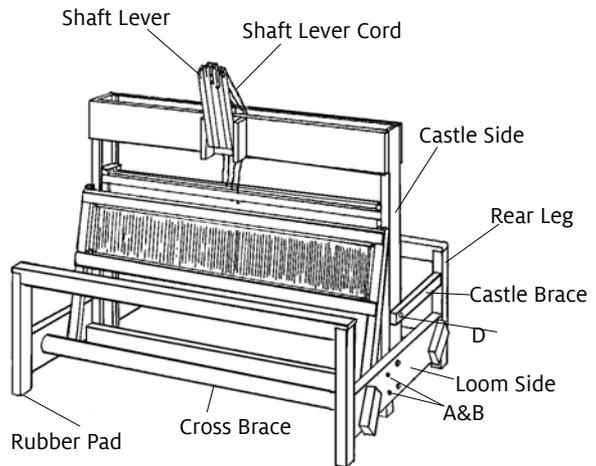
ASSEMBLED 4-SHAFT LOOM
